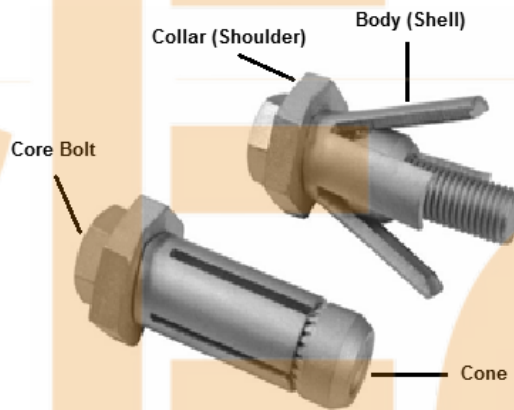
TYPICAL BOX BOLT® TYPE C BLIND FASTENER
